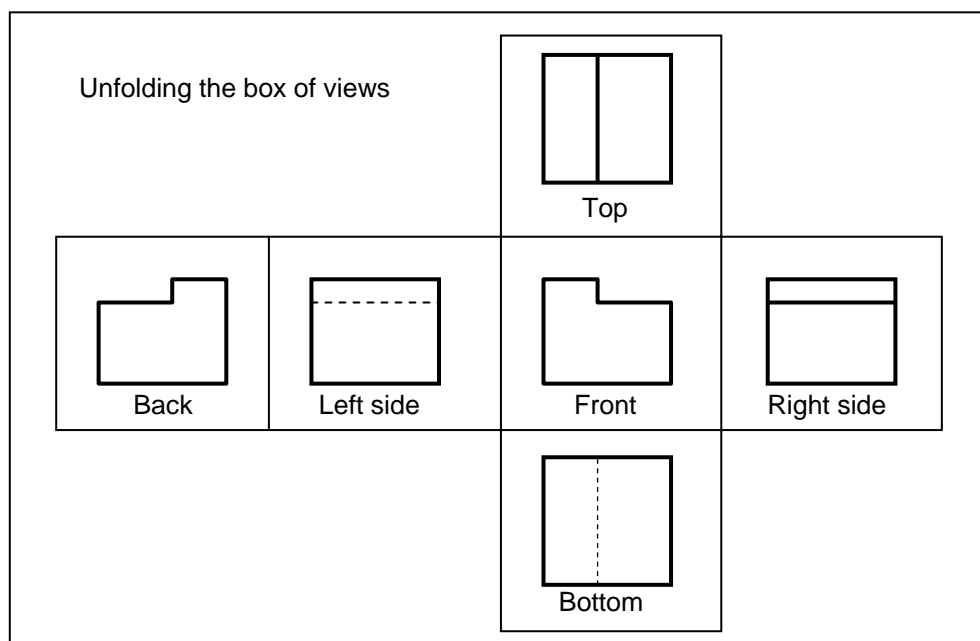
Unfolding the box of view into an orthographic projection drawing.
